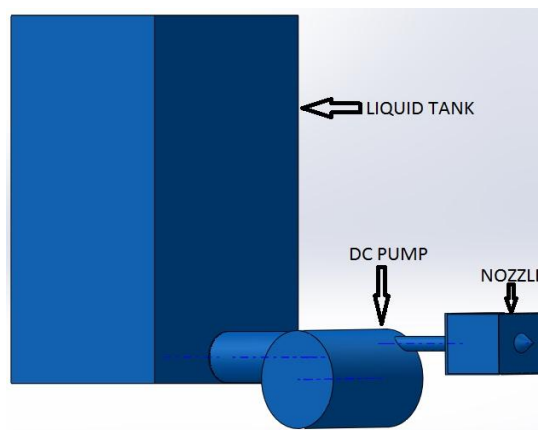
Assemble View of Spraying Nozzle, Dc Pump And Liquid Tank
